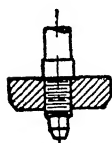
(left).—FOUNDATION BOLT AND PLATE THREADED
